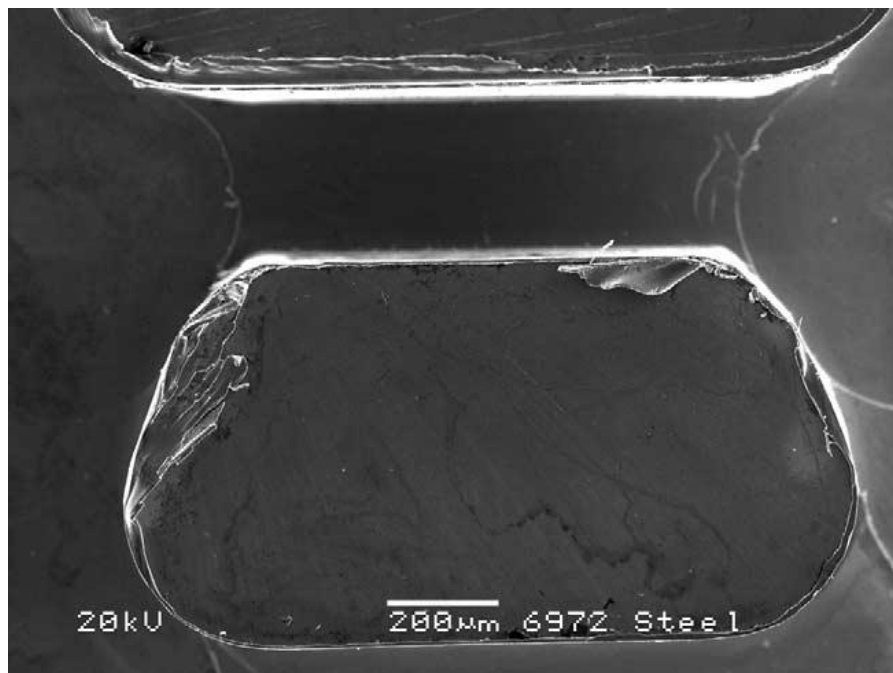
Micro milled injection mold insert in tool steel (35 HR_c) [8].
